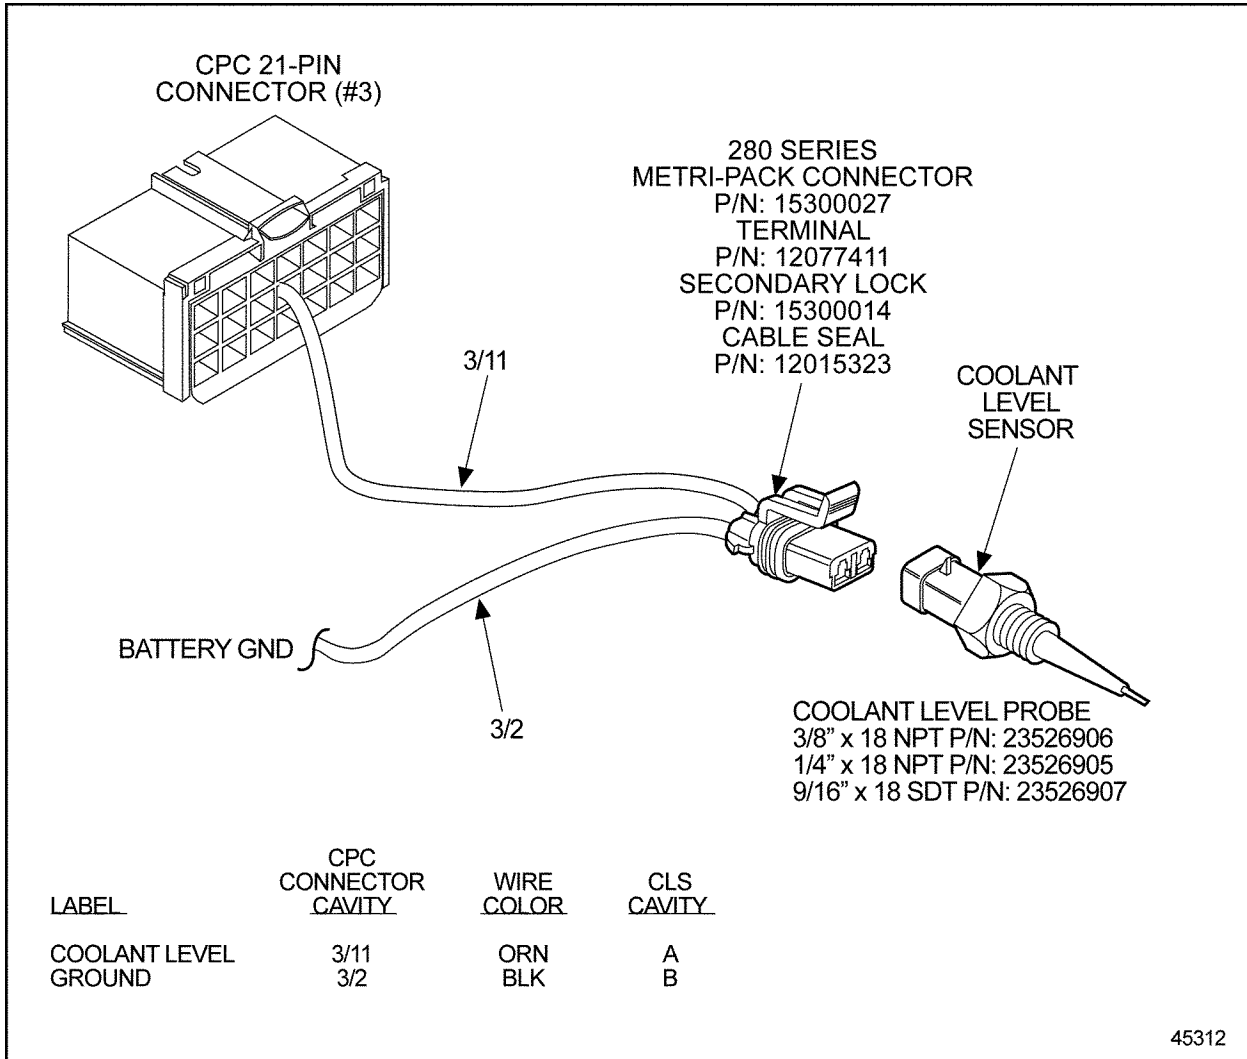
Engine Coolant Level Sensor Installation for CPC
